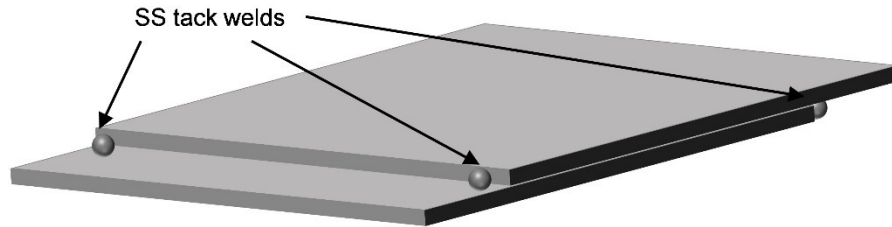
Schematic of stainless steel tack weld locations on gap filling test specimens.
